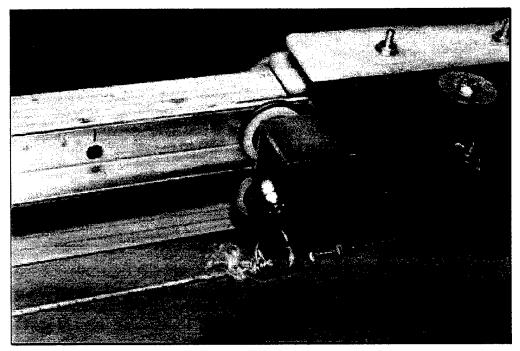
Portion of the payload and wheeled slider assembly - rubber "tires" on the wheels grip a flange to provide quiet operation.
